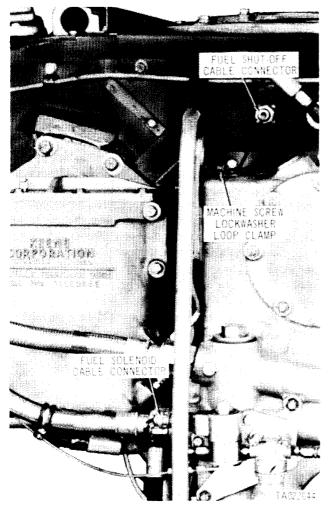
Removing or installing fuel solenoid and fuel shut-off connector.
